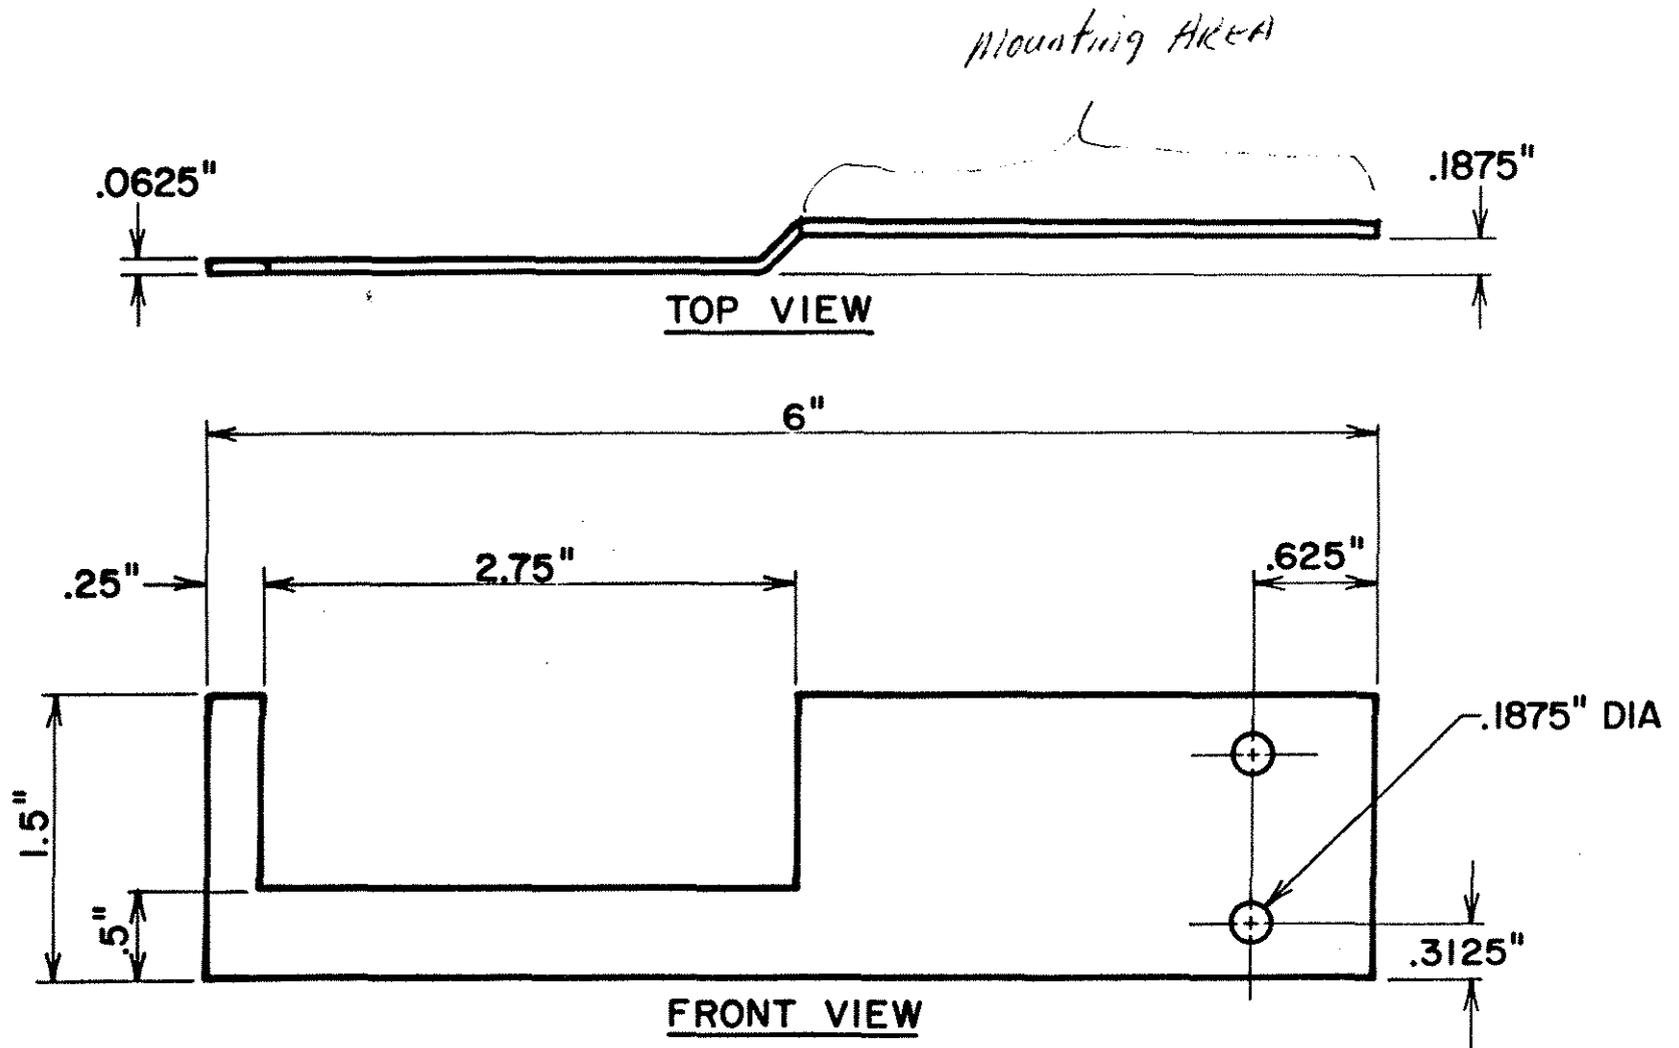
Engineering drawing of the overlapping plate of the crack monitor gauge.
